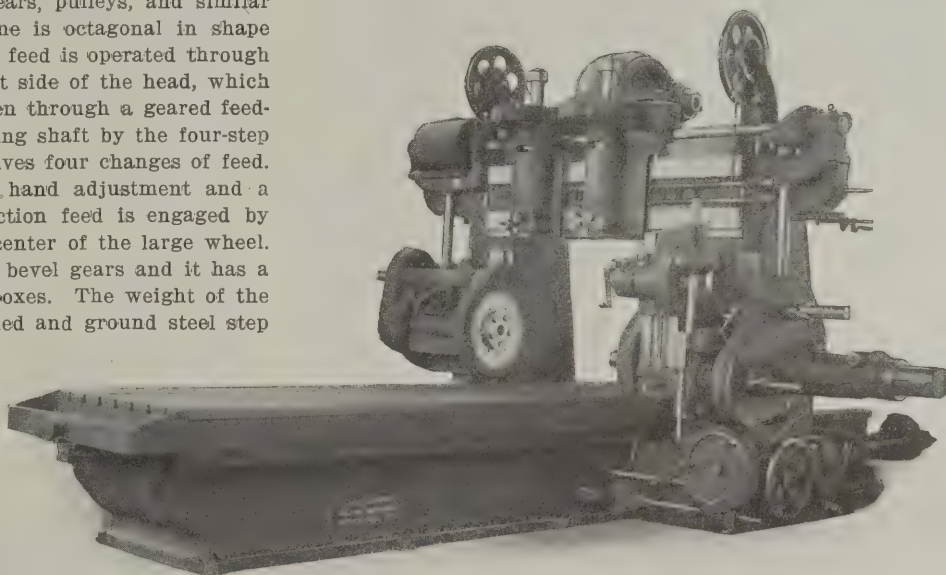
Ingersoll Five-head, Six-spindle Milling Machine
